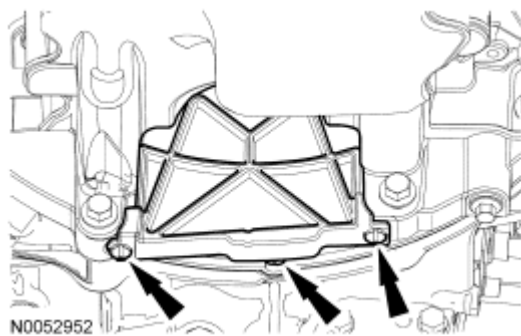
Identifying Inspection Cover & Fasteners
